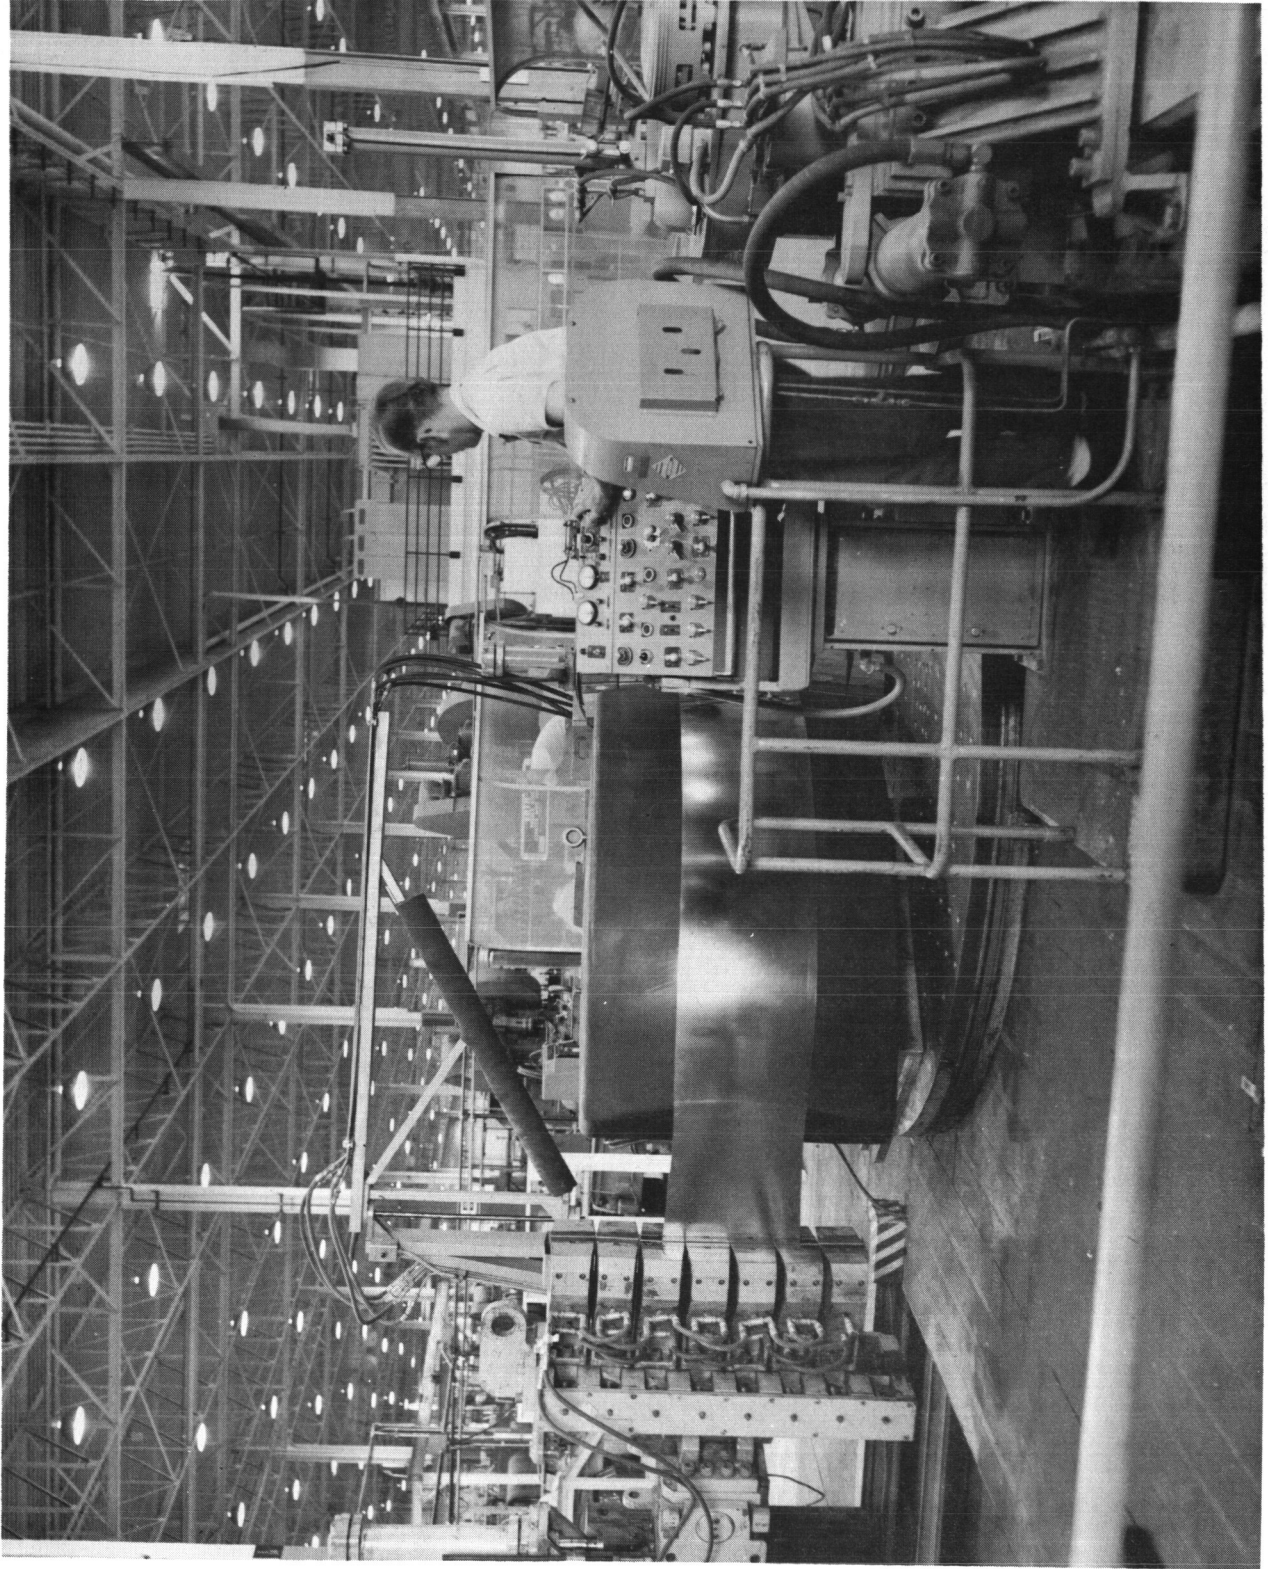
Stretch-forming bulkhead gorge from 0.014" thick, 18-3/4" wide sheet of 5Al-2.5Sn-Ti alloy on tooling for Atlas fabrication. Cyril Bath stretch-former.
